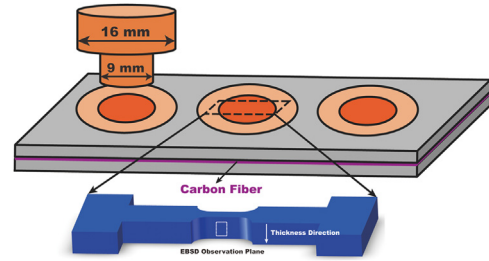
The schematic of welding process and sampled *in-situ* tensile specimen with testing plane.
